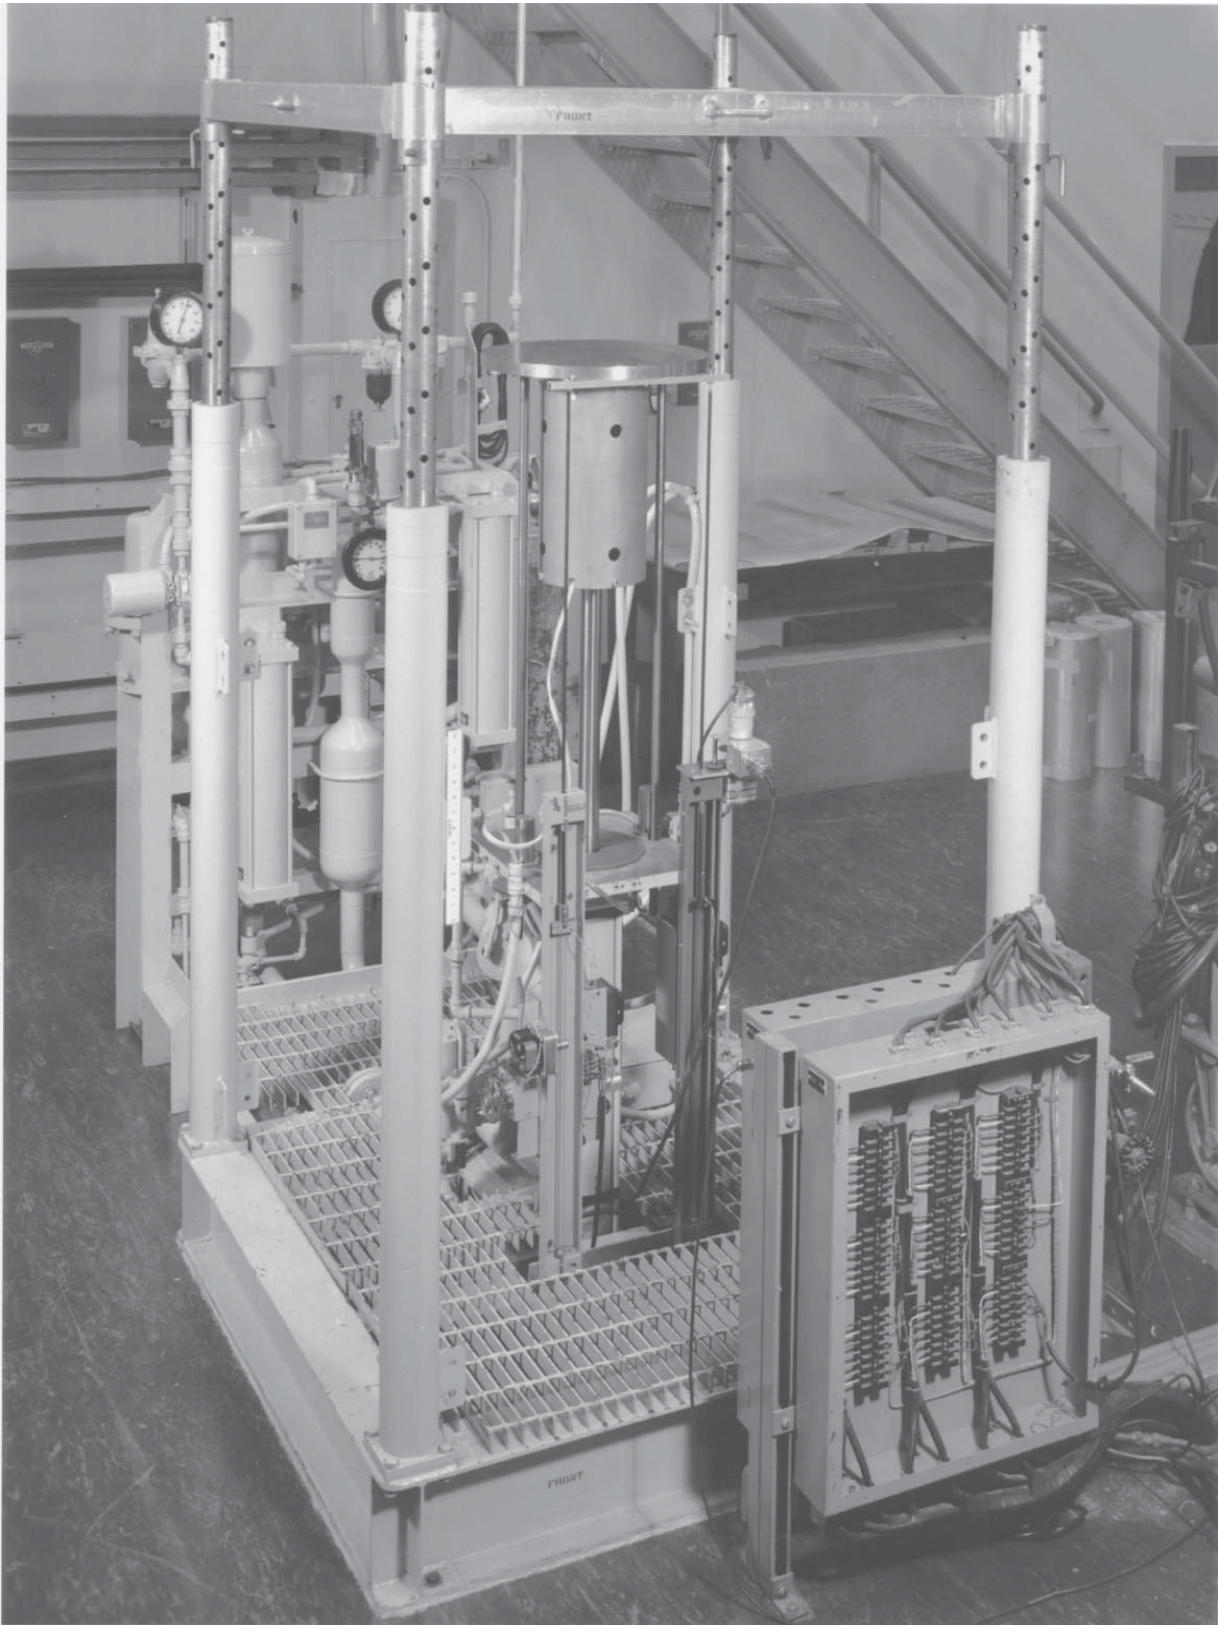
Photograph of the Vertical Assembly Machine with the Movable Table Up.
